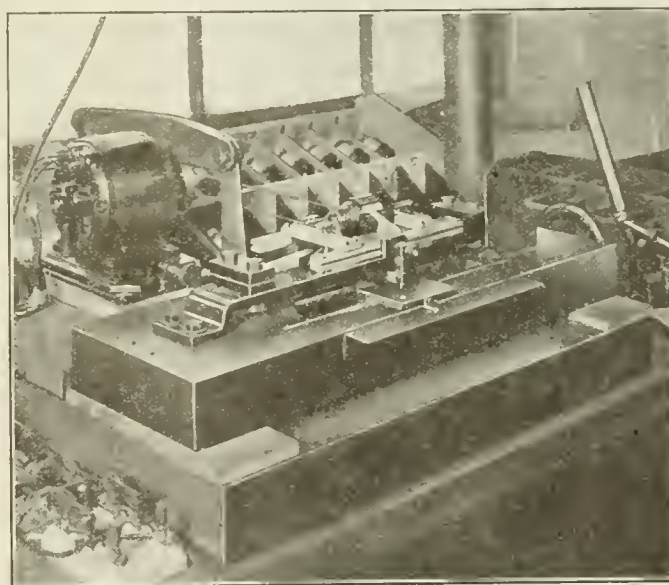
BALANCING MACHINE SLIGHTLY MODIFIED
